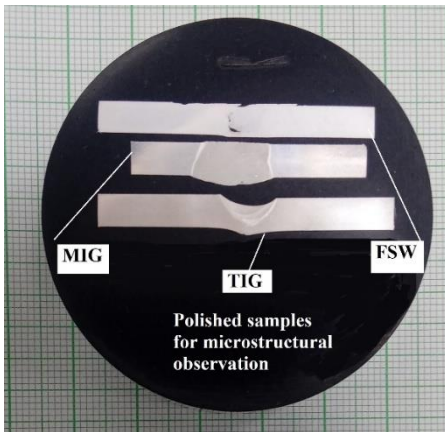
Polished and etched surfaces of three welded plates
